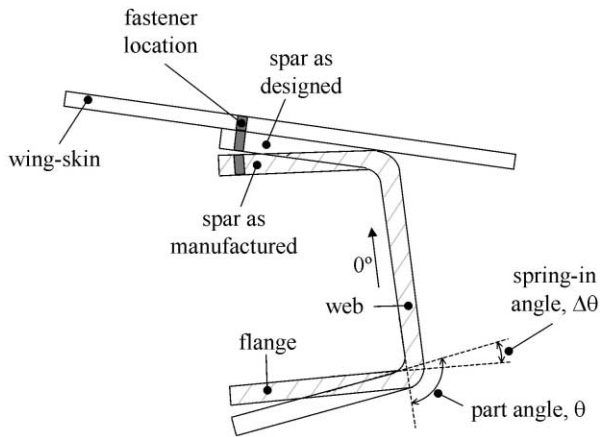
Schematic of a typical spar/wing-skin assembly.
